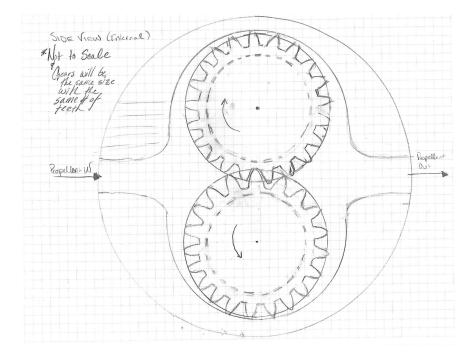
Idea 1 Side View - This is an external gear pump in a cylindrical housing. Wall thicknesses, gear size, gear tooth amount will all depend on further pump and structure design.
